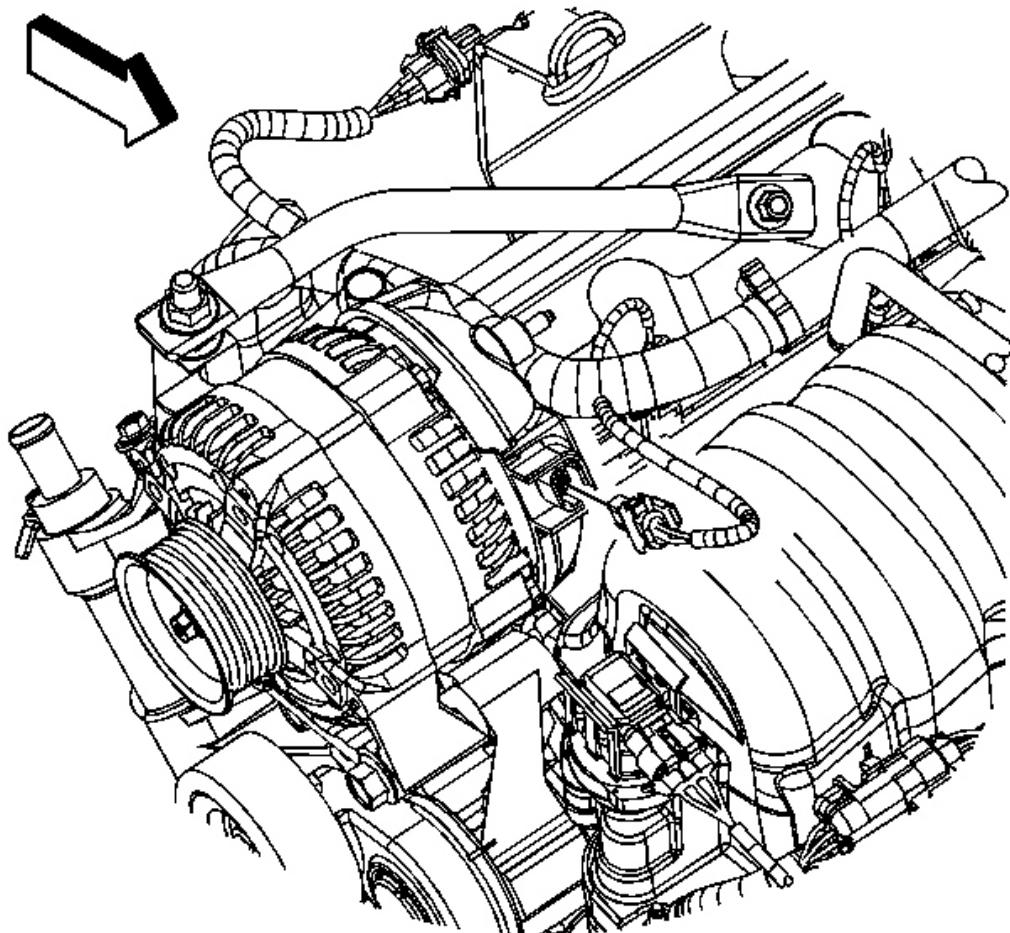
Identifying Throttle Actuator Harness Connector
